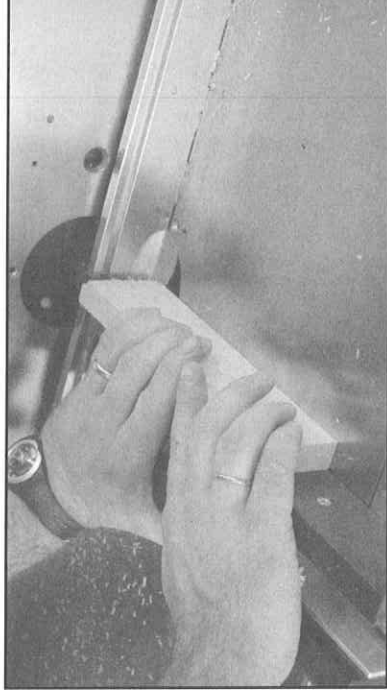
Make shoulder cuts on top and bottom edges moving from left-to-right.
